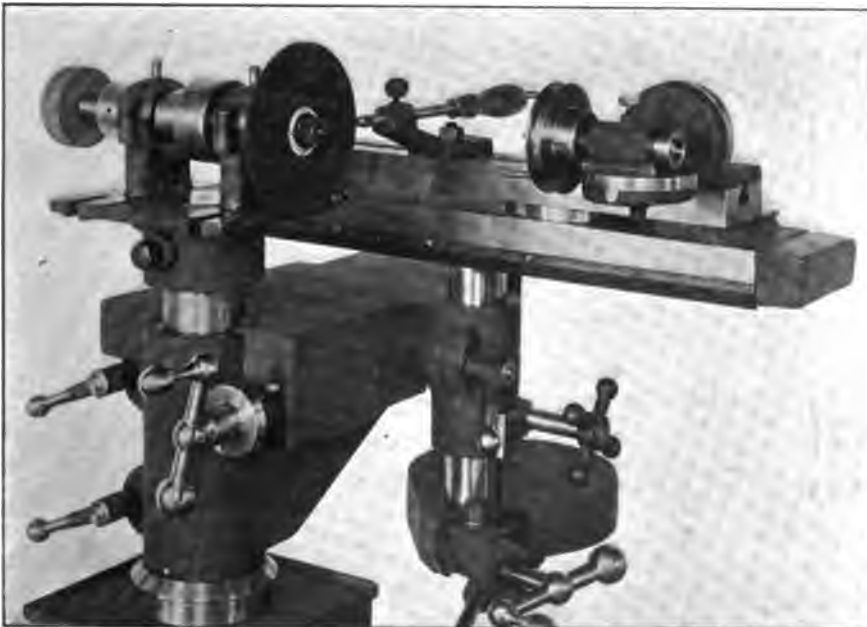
The dresser should be a diamond tool, held firmly in a post, as shown here.
